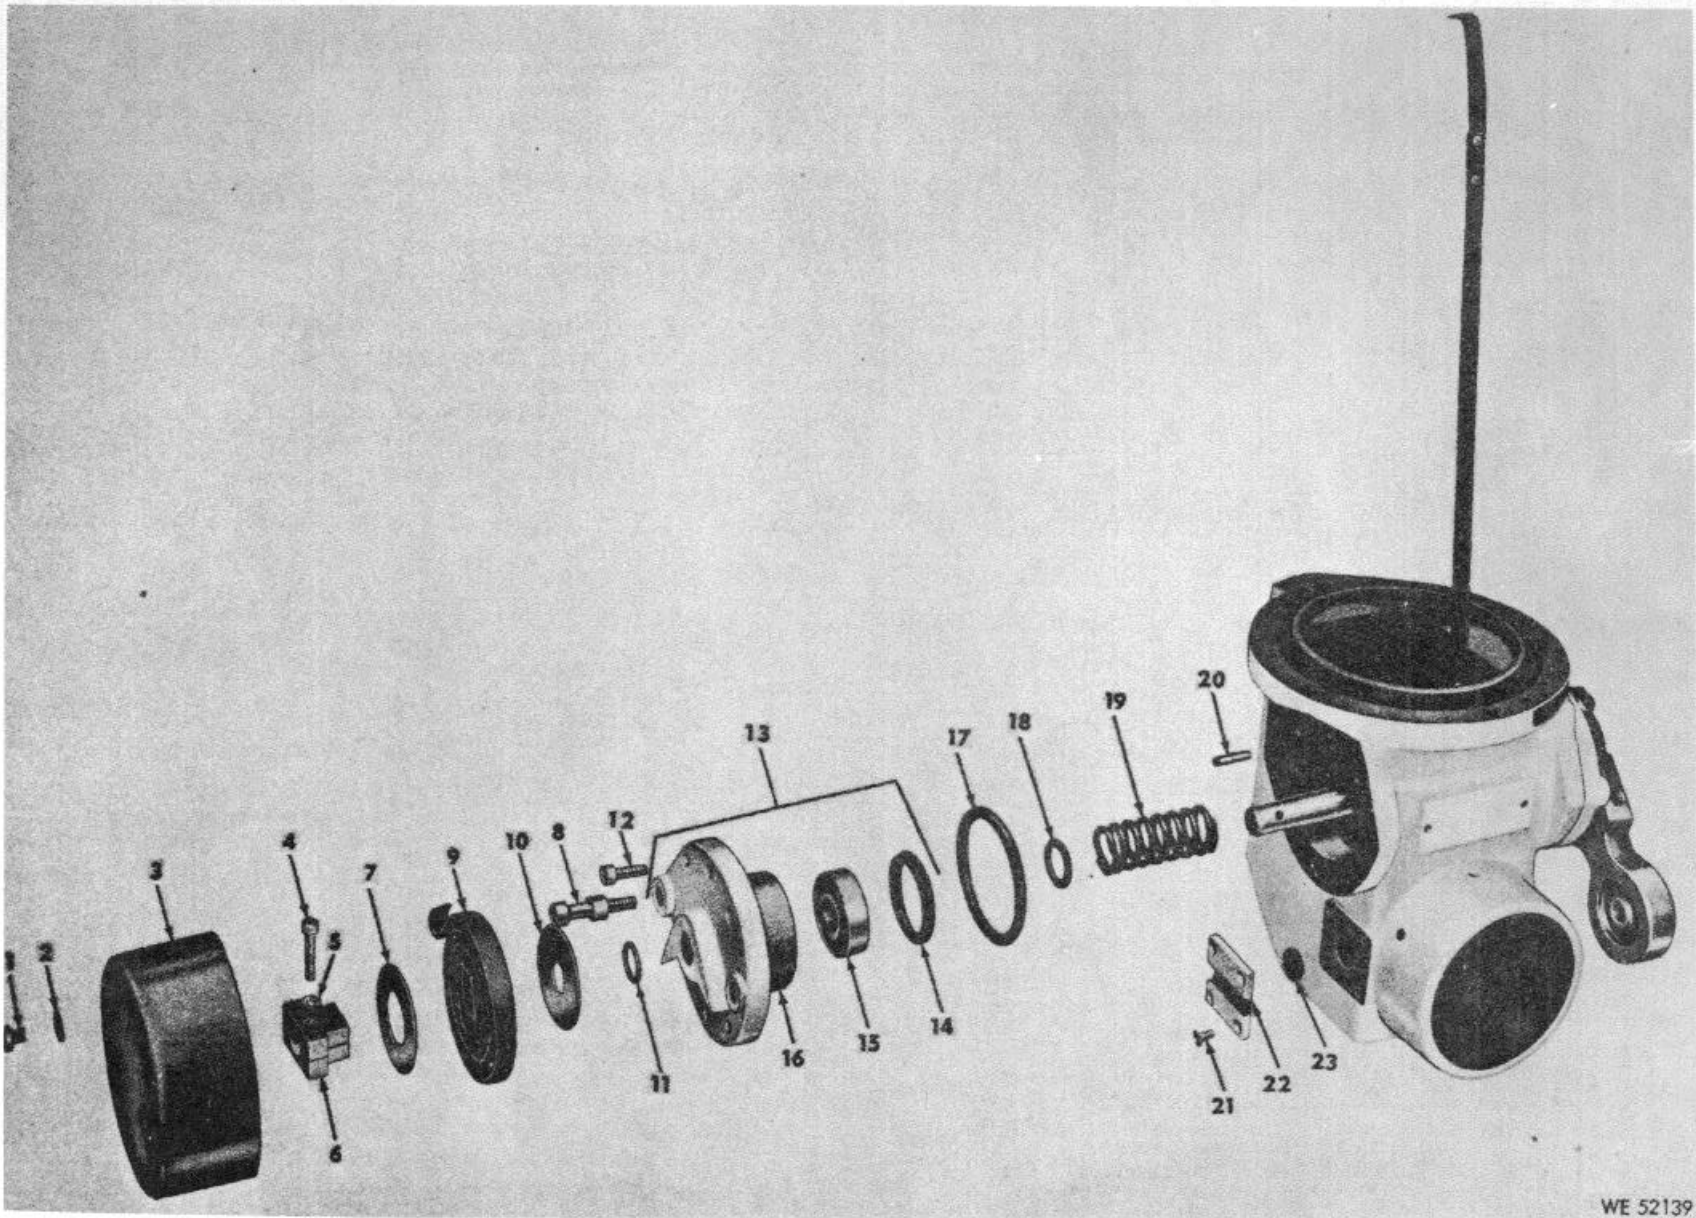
Eyepiece assembly 8270647 (M28), 8295430 (M28C), or 8565261 (M28D).
